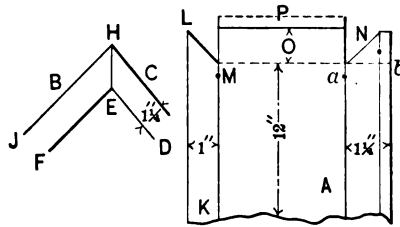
Gauge for Cutting End of Strip to Fit Comb.
